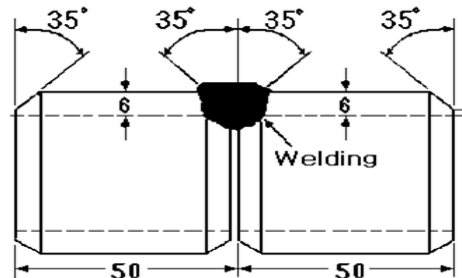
Schematic diagram of welding specimen of pipe.
